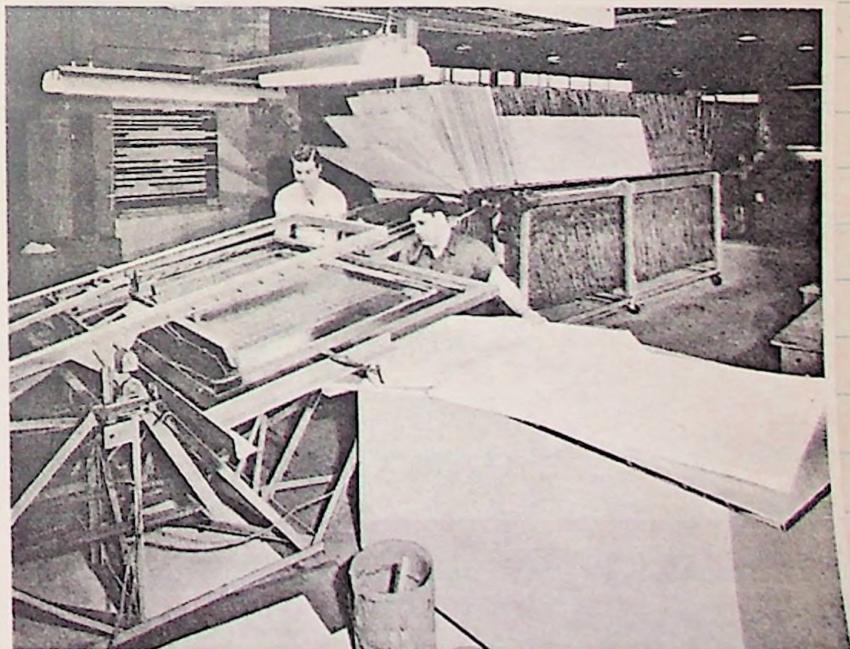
View of printing department, showing automatic printing and drying equipment in use.
